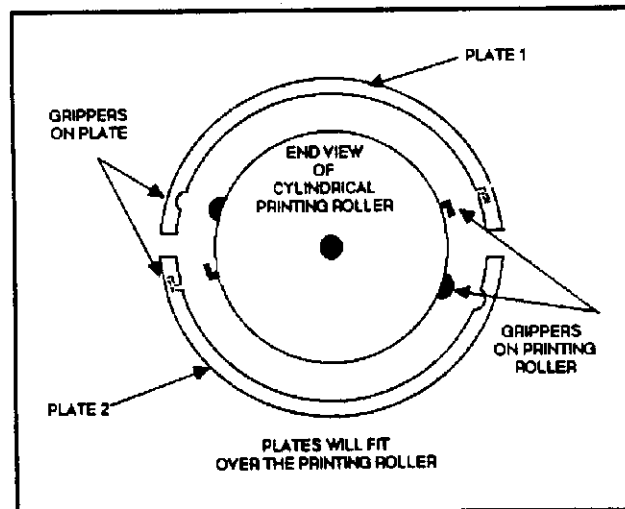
End view of plates and roller before assembly to show grippers.
